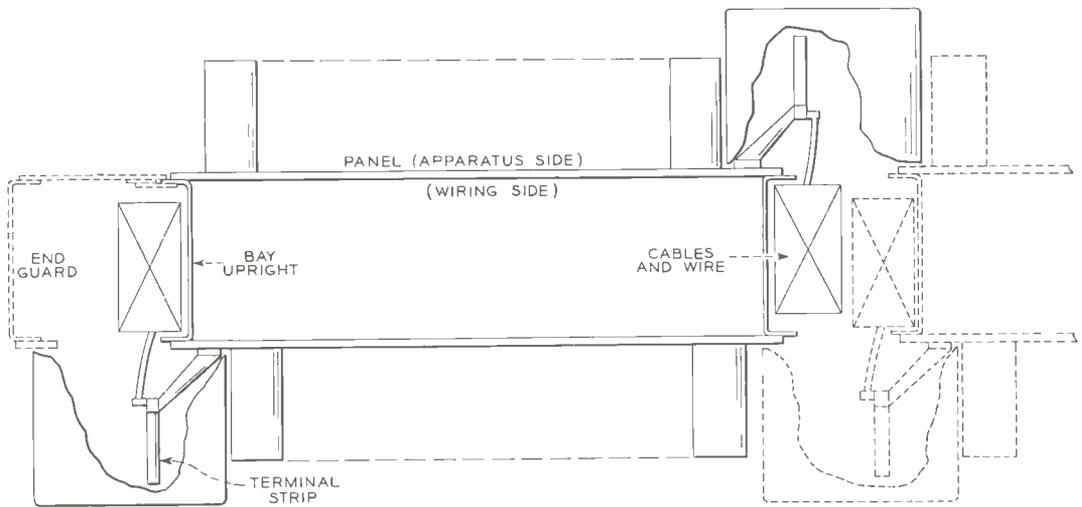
Cross section of the new duct type bay arranged for double-sided mounting.
